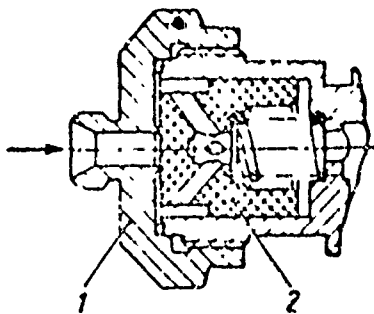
Initial design of a relief valve: 1 - body, 2 - valve.
